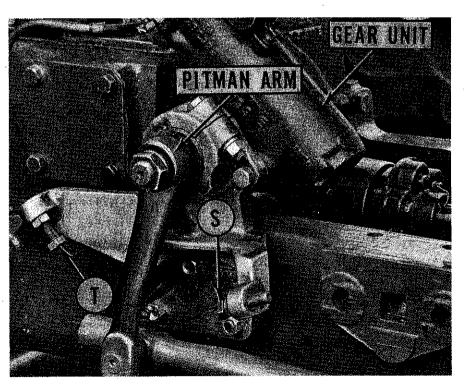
Steering gear installation on 303 and 404 tractors. Stop screws (S and T) control turning radius of front wheels. Some later tractors may not be provided with these adjustable stops.
